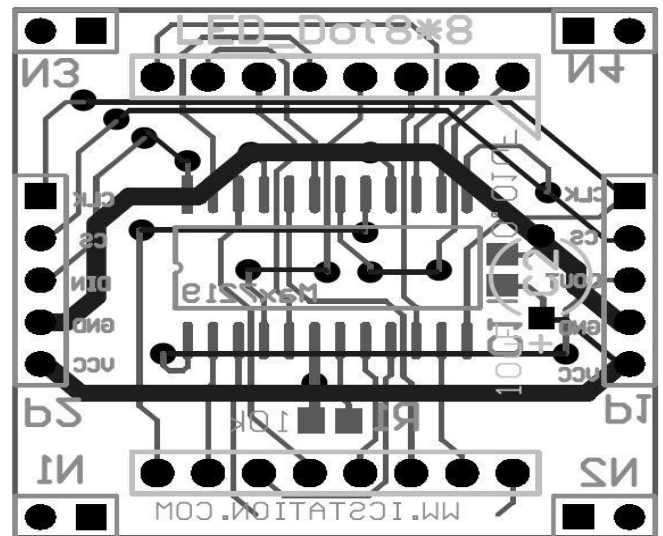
(PCB Layout of a 8x8 Matrix LED)
